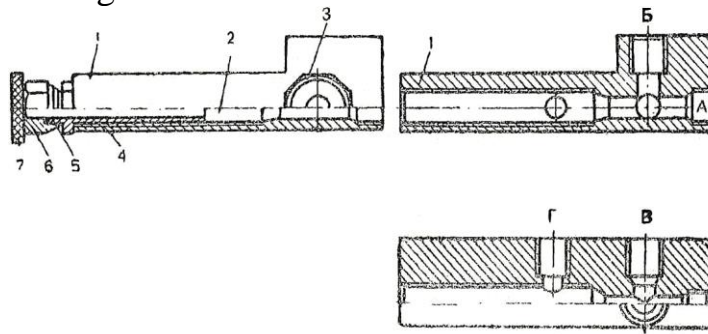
Device device PPG-1M: 1 - body, 2 - sock; 3, 4 - fittings; 5 - seals; 6 - roller nut; 7 - flywheel; A - the entrance hole; B - a hole for a pressure gauge; B - hole in front of the throttle; G - hole after the throttle.
